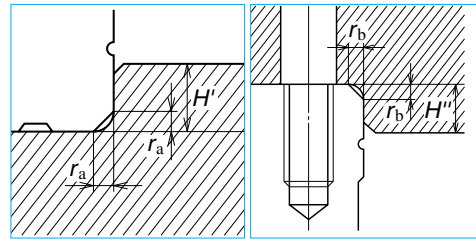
Shoulder for the rail datum face Fig. II-9-11 Shoulder for the ball side datum face
